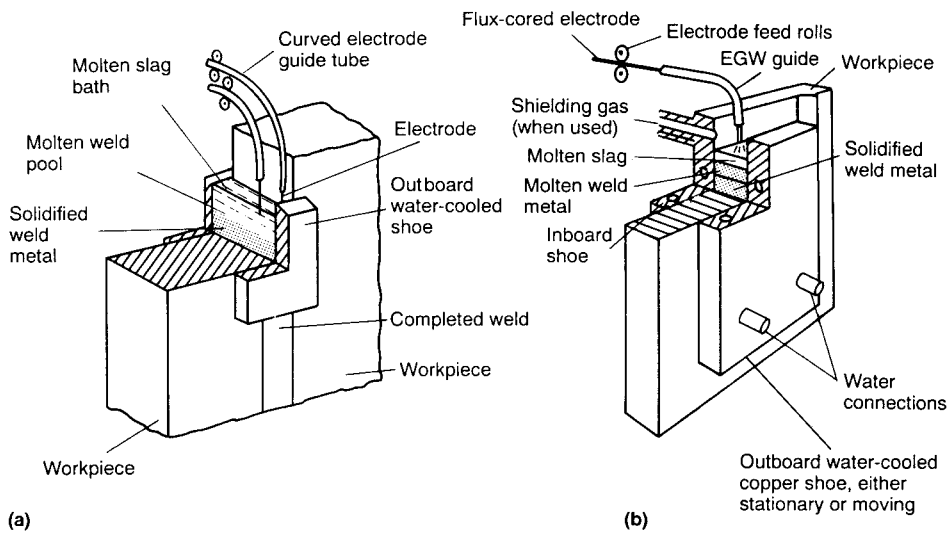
Schematics comparing primary components of two vertical welding processes in which molten weld pools are confined by cooling shoes. (a) Electroslag welding. (b) Electrogas welding (EGW)
